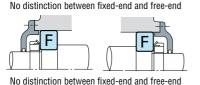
Bearing Mounting Arrangements and Bearing Types
